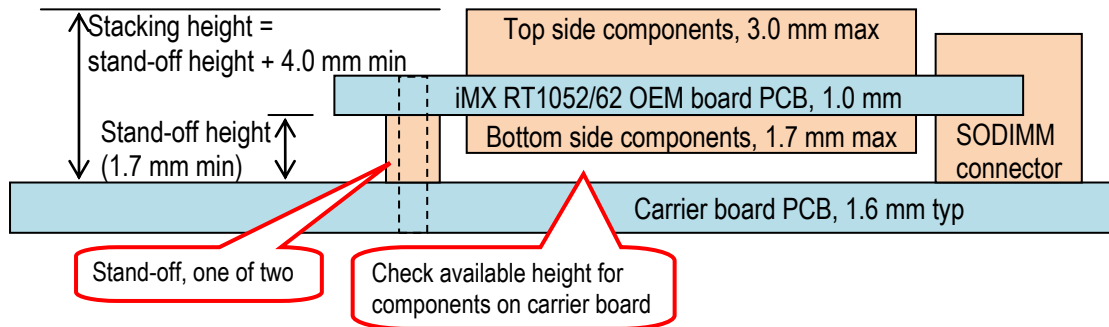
OEM Board Mounting in DDR SO-DIMM Connector, Stacking Height
